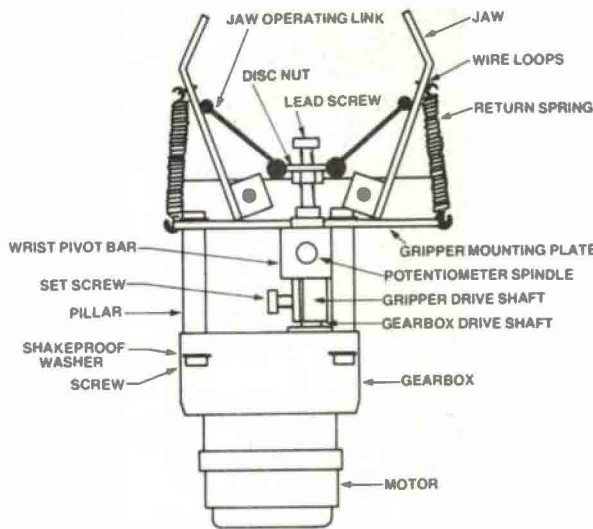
The gripper assembly showing motor mounting, jaw components and pivot bar, etc.
